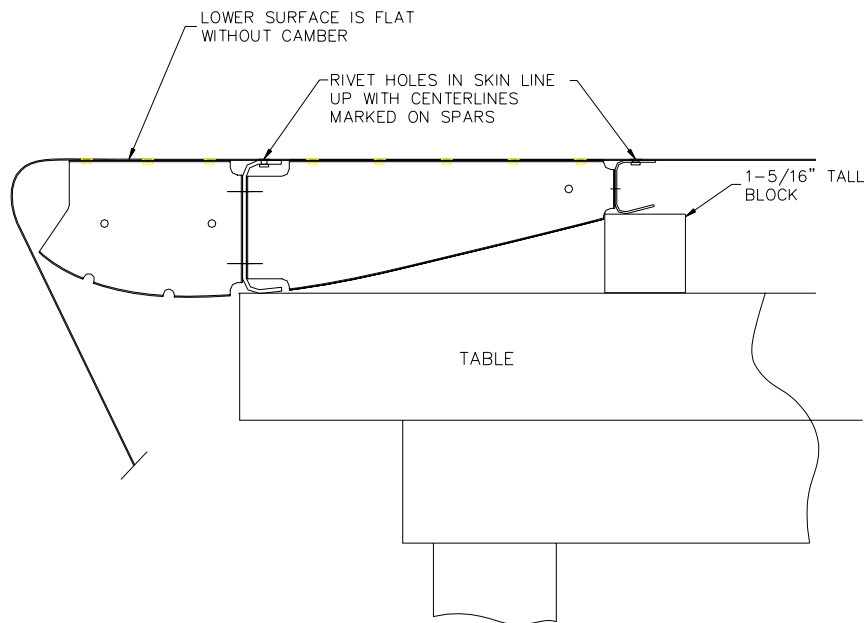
Clamping the Spar/Rib Assembly to the Bench
